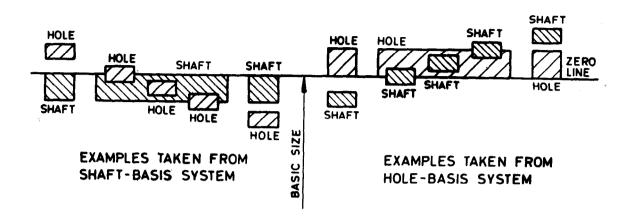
EXAMPLES ILLUSTRATING THE SHAFT BASIS AND HOLE BASIS SYSTEM
